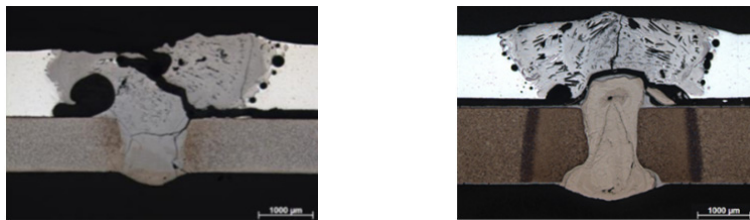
Cross-sections of dissimilar lap welds of AA6016-T4 ( $t = 1.15$  mm) and HX220LAD+Z100 ( $t = 1.00$  mm) [left] and AA6016-T4 ( $t = 1.15$  mm) and 22MnB5+AS150 ( $t = 1.50$  mm) [right].
